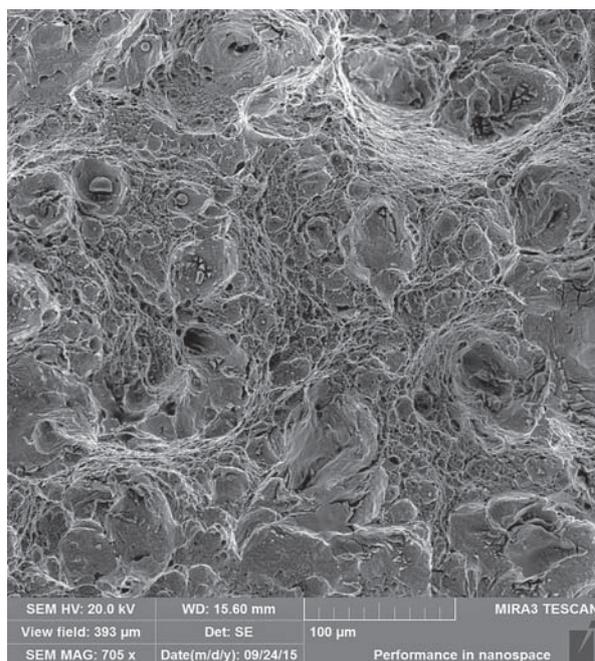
Fracture surface of specimen S3D with V - notch
